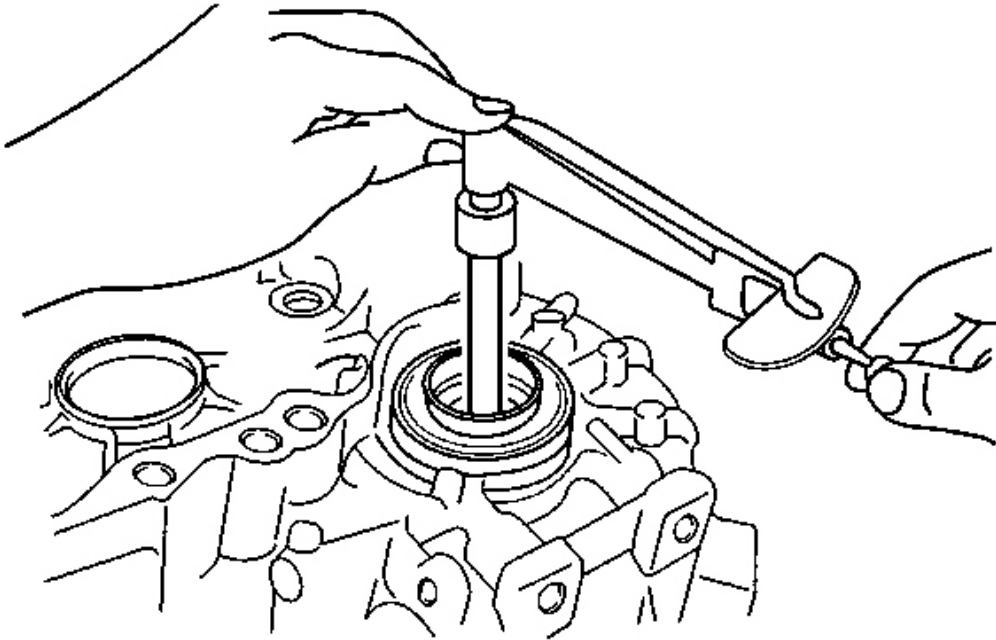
Measuring Preload Of Differential Gear Using A Small Torque Wrench & DT 46461
